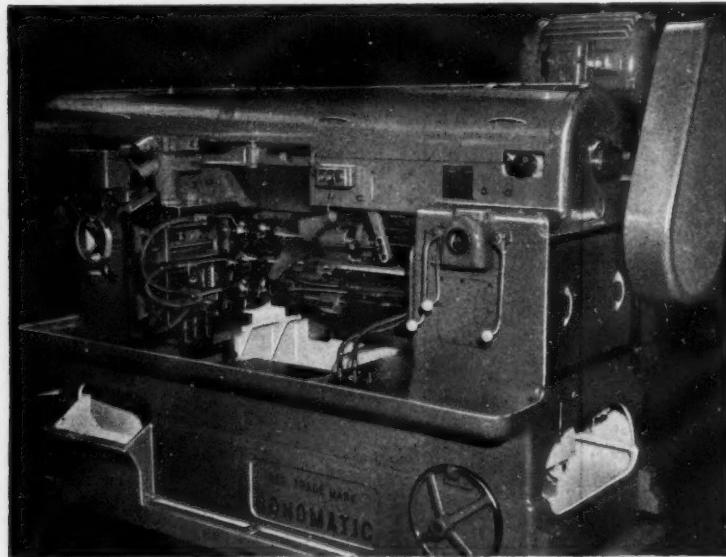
This 1½-in.-6 Conomatic was demonstrated at the Milan Machine Tool Exhibition, set up for producing stainless-steel valve seats
